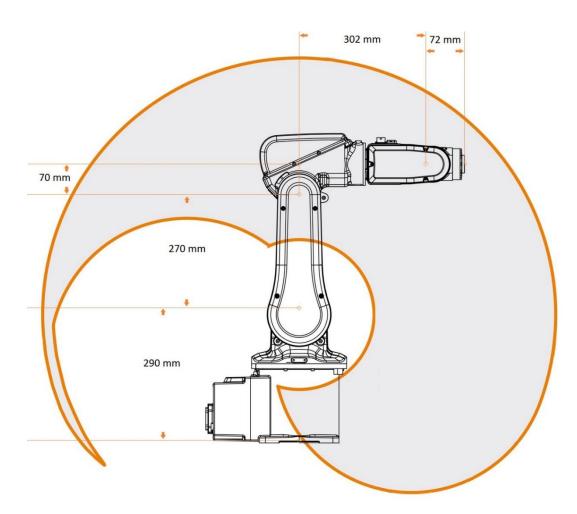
Technical Drawing of the IRB120 Robotic Arm
